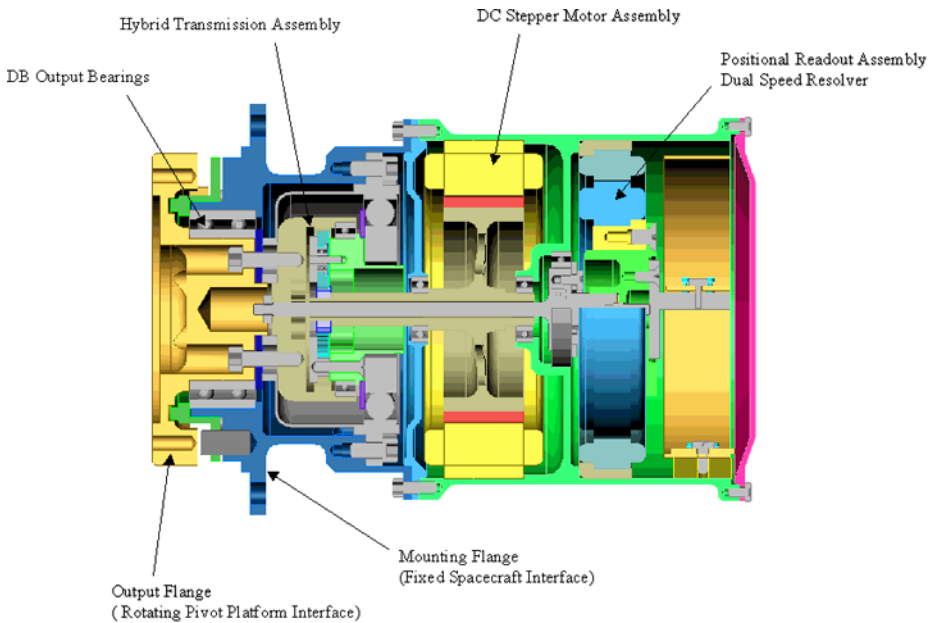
Schematic view of the pivot actuator, with callouts identifying the hybrid transmission system and duplex pair radial bearings with outer races back-to-back (DB). An in-line planetary gear system drives a harmonic drive, achieving the accurate small-step pointing of MDIS. Individual motor windings are routed to each DPU, making the pivot actuator fully redundant
